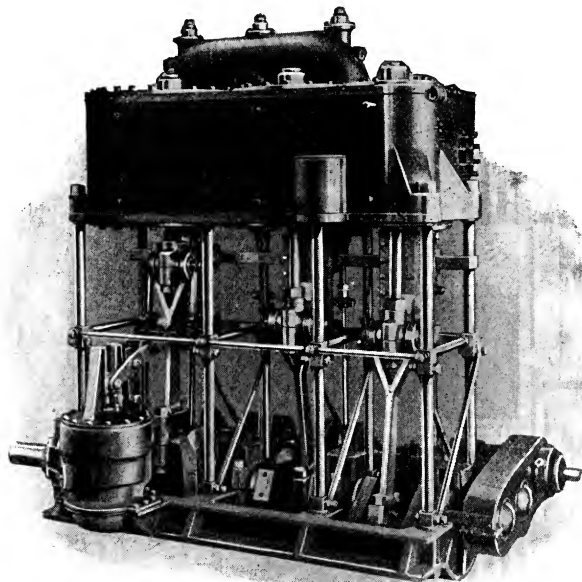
,093.—Seabury 275 horse power three cylinder triple expansion yacht engine, size $8 \times 12\frac{3}{4}$ and 20×10 .
